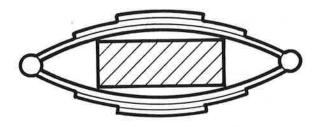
SCHEMATIC SHOWING HOW CABOOSE SPRINGS WERE BLOCKED.
